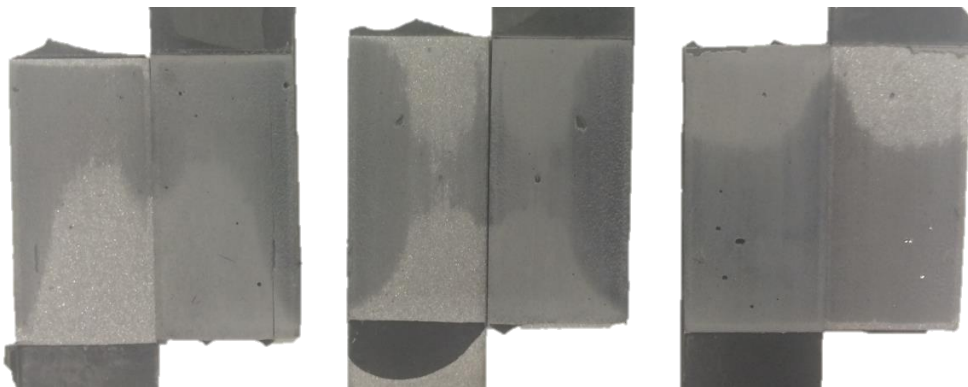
Failure modes of CFRP (2.1 mm)/HSS (1 mm) 50 mm overlap SLJs tested specimens
